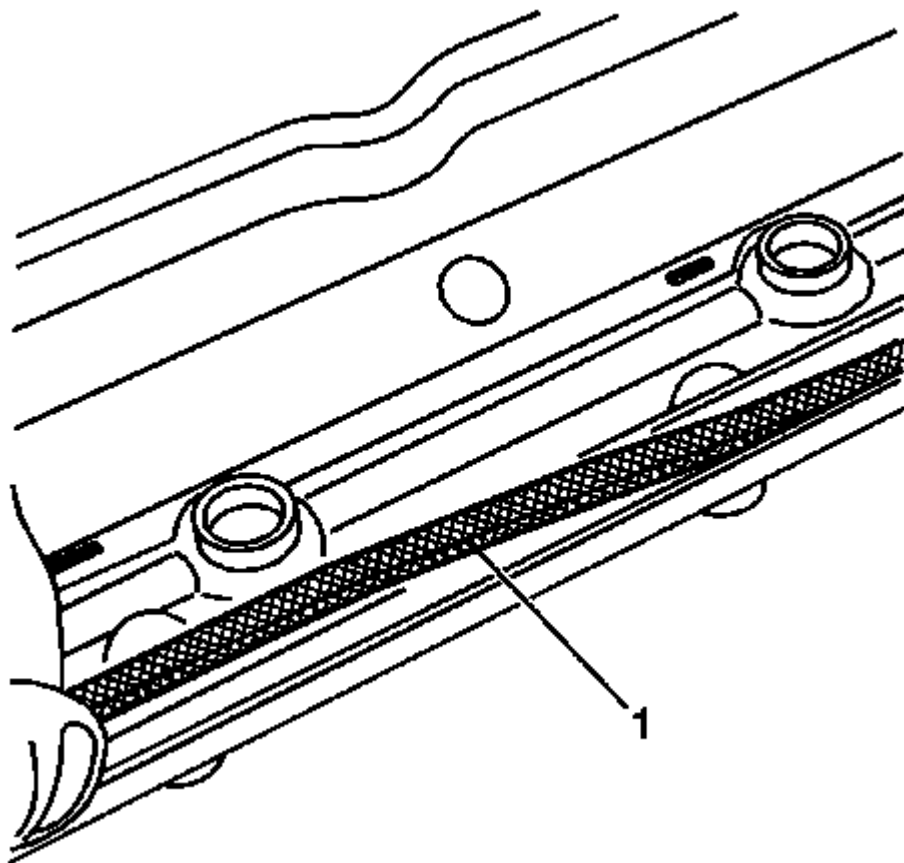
View Of Rocker Arm Cover Gasket
